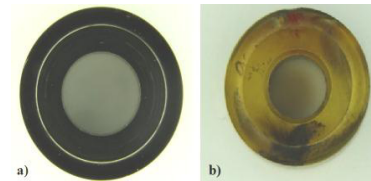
Figure Rake faces of worn tools a) SPRT b) Stationary tool.
